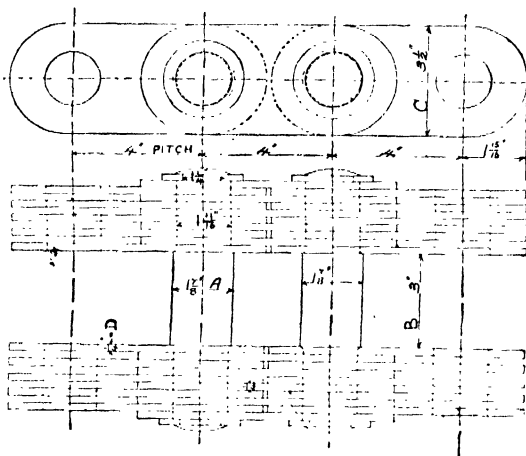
illustrates a working drawing used in the manufacture of such chains.
